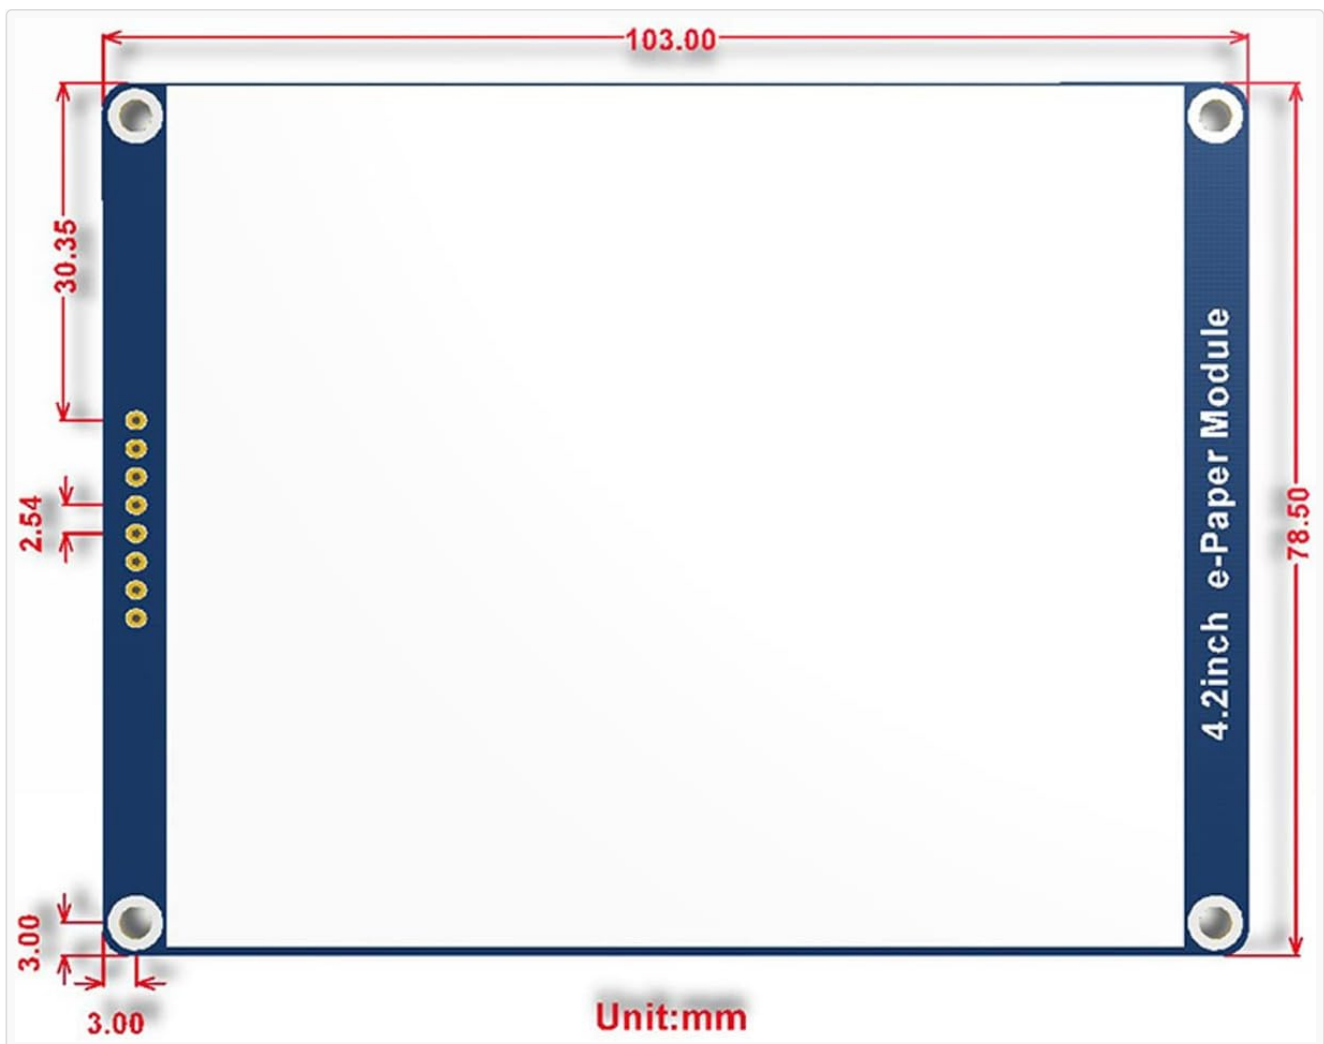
Dimensional drawing of the 4.2-inch E-Ink Display Module (B), with measurements in millimeters.
